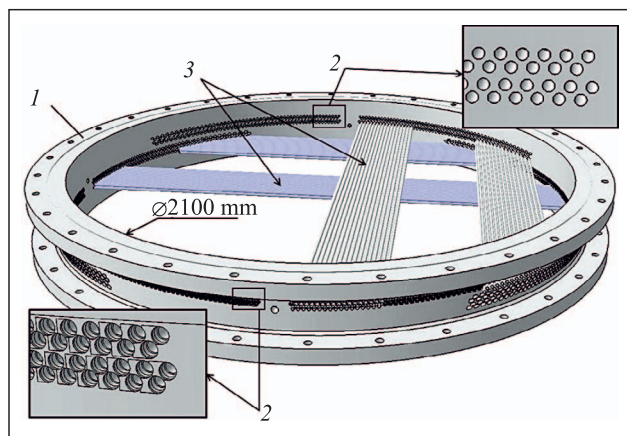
The two-coordinate round chamber design: 1 — chamber; 2 — holes for tubes; 3 — tubes
